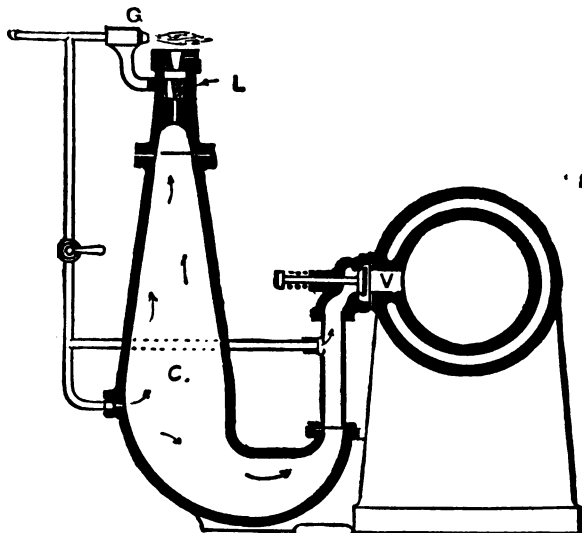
Clerk-Lanchester High-pressure Self-starter.
